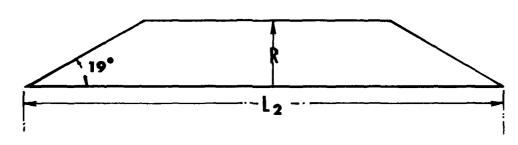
CROSS-SECTION AND SIDE VIEW OF BEAD
